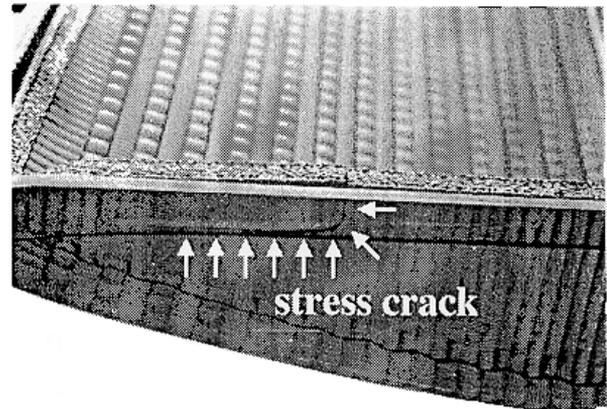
Stress cracking in tail lights. Welding induces internal stresses which later cause cracks to form.
